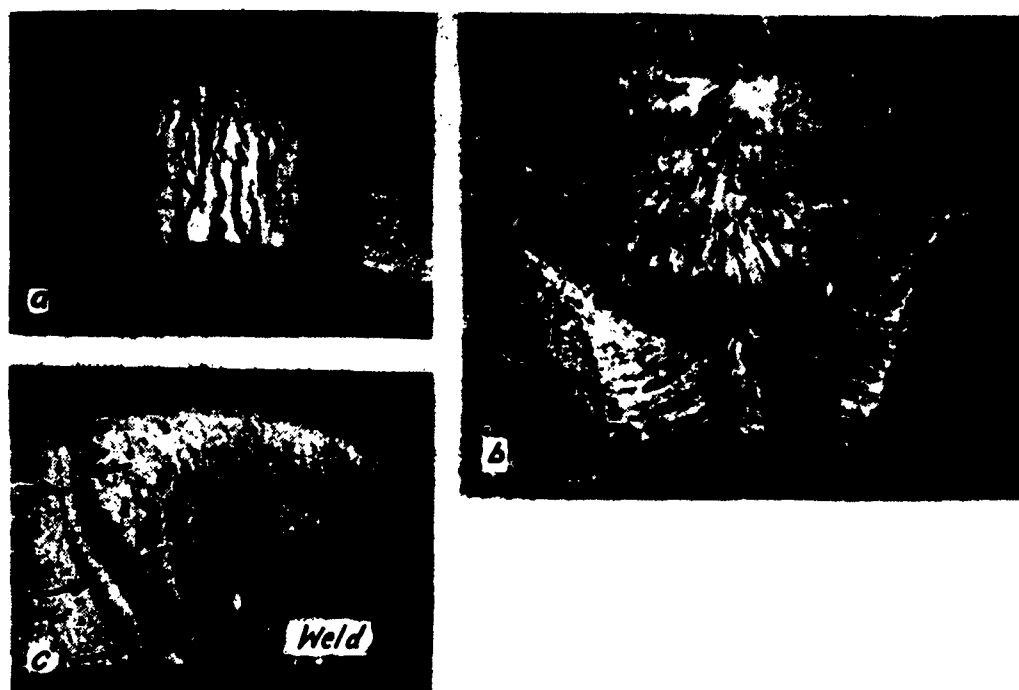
Examples of the weld joint intergranular corrosion:
